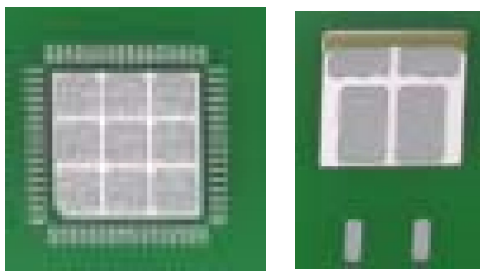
Solder Paste Print Configuration (Examples of window pane solder prints on QFP and DPAK components used in benchmark samples)
